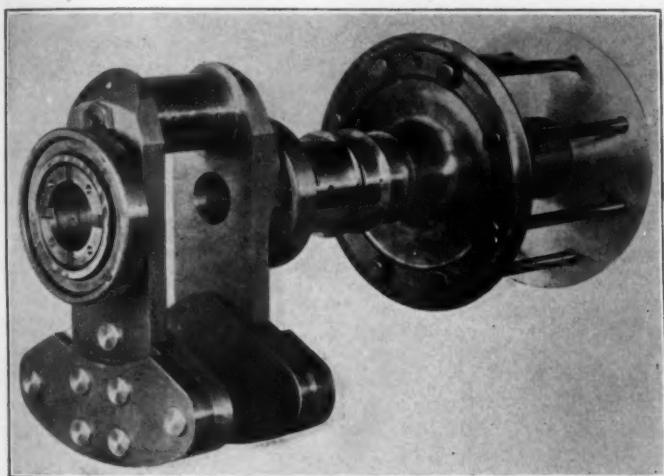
CRANKSHAFT AND PROPELLER-HUB ASSEMBLY
